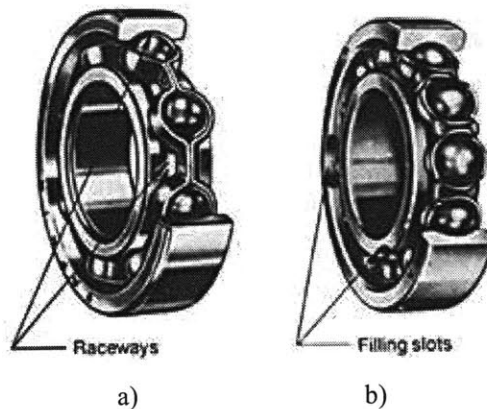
a) Conrad ball bearing, b) filling slot ball bearing [46].
